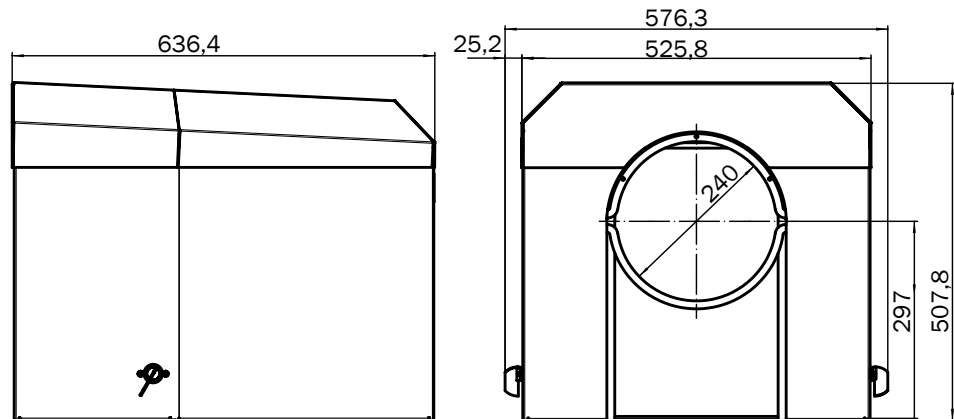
Weather hood for sender/receiver unit (dimensions in mm)
